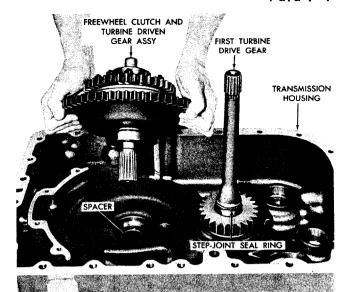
Installing freewheel clutch and turbine driven gear assembly (-3 model)
